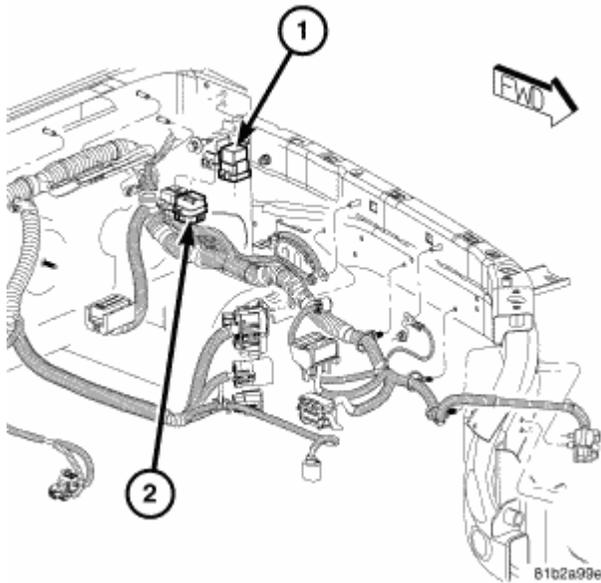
Identifying Fuel Heater Relay & Electrical Connector
